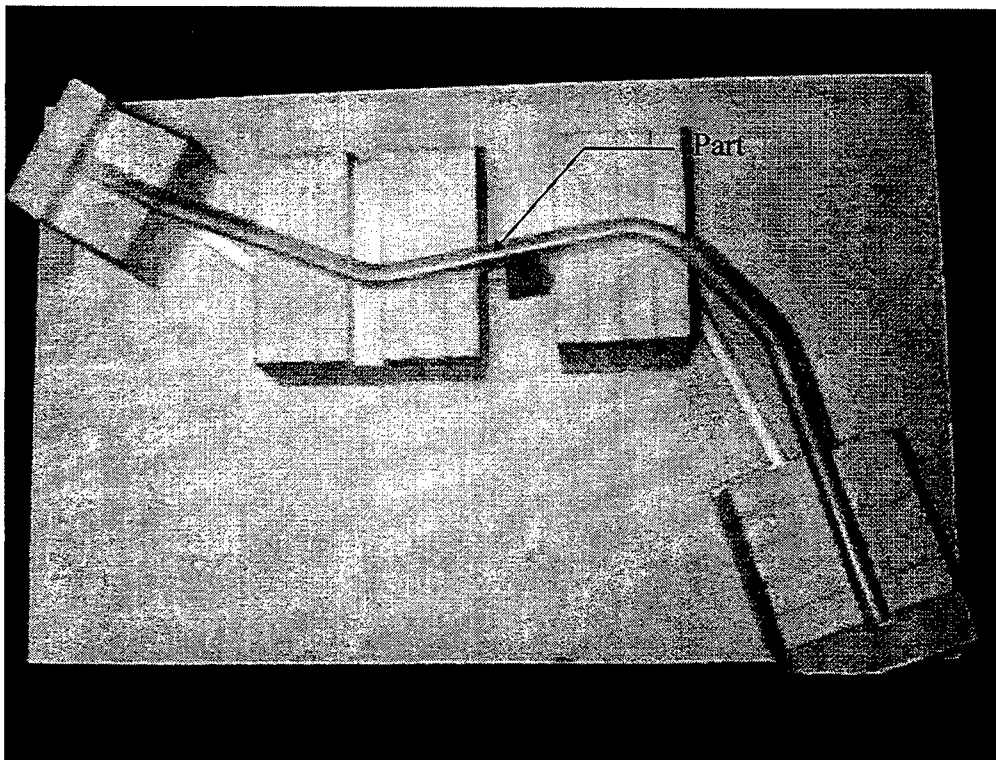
This figure shows the complete assembly of the Rectangular Grid fixture with the part mounted on it.
